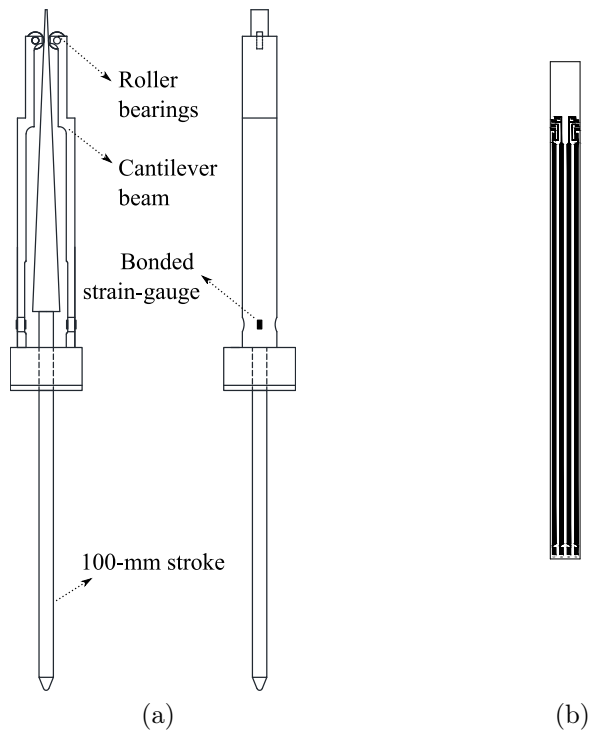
In-house made displacement transducer: (a) Inner design schematic (b) PCB board manufactured for strain-gauge wiring.
